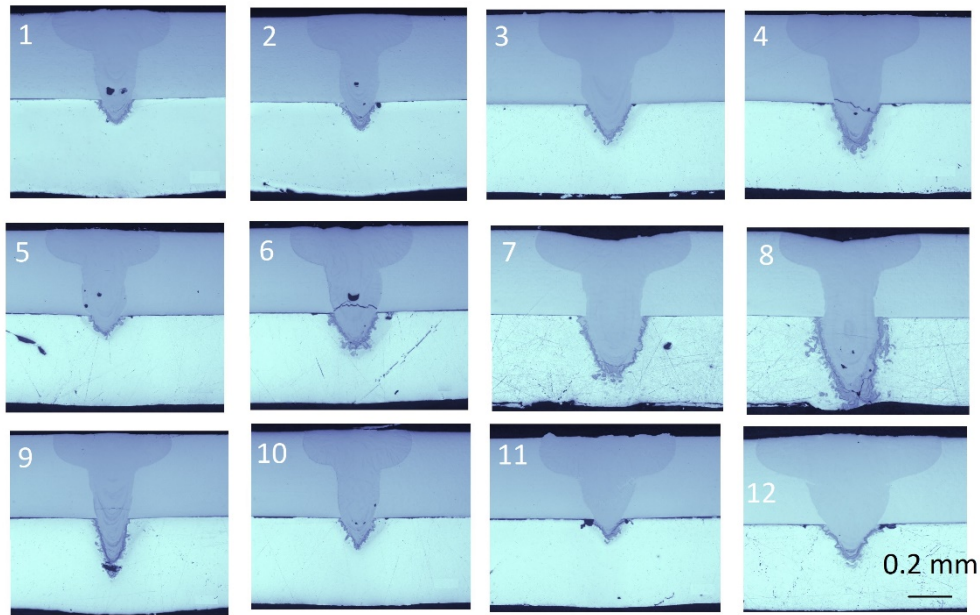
Cross sections of laser welded dissimilar joint of stainless steel 316L and aluminium alloy A1050; sample numbers are correlated with data presented in Table 1.
